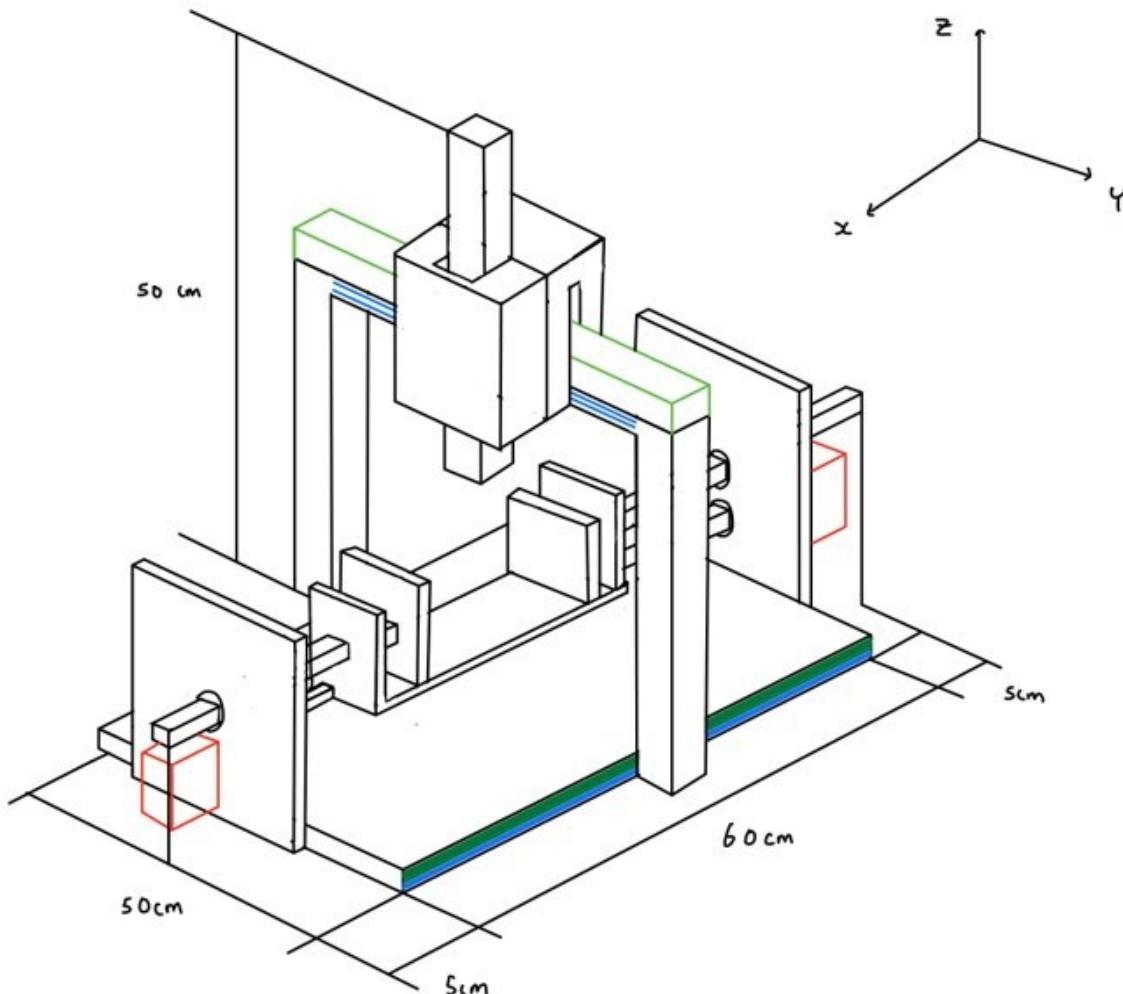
Isometric view of the Three Rack and Pinion, with rough dimensions.
